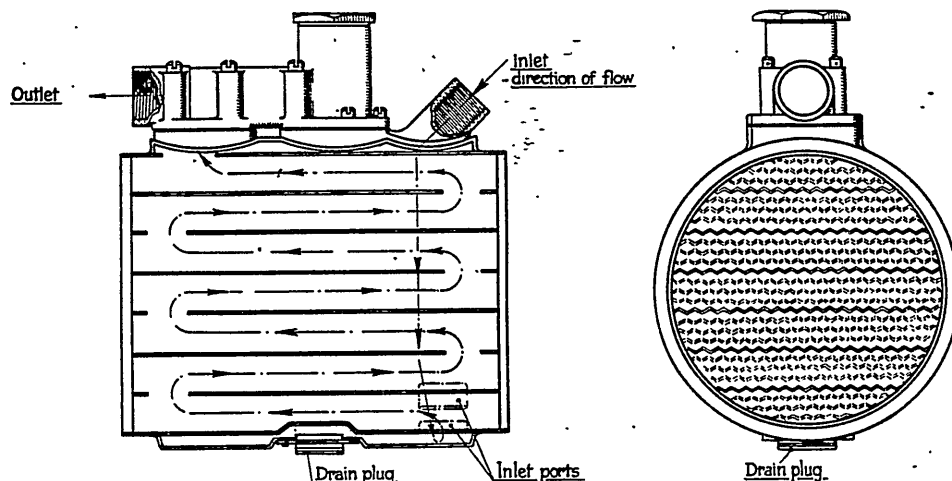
Serck oil cooler, showing baffles and direction of oil flow
